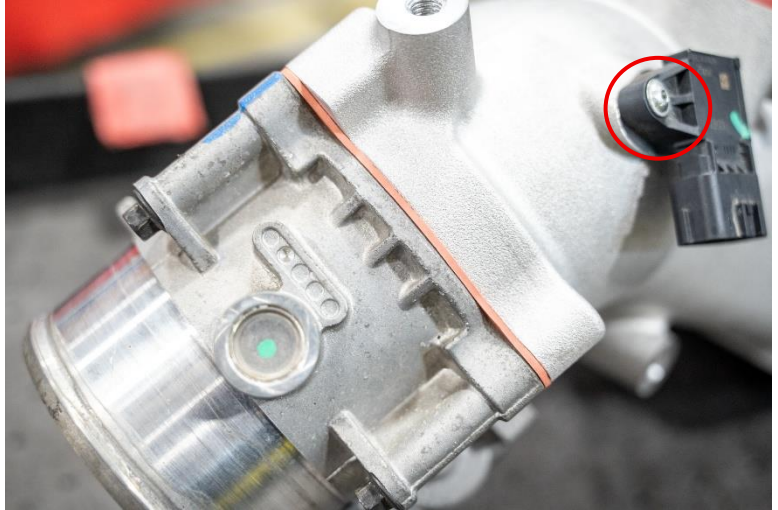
Throttle valve assembly and intake horn prior to disassembly.
